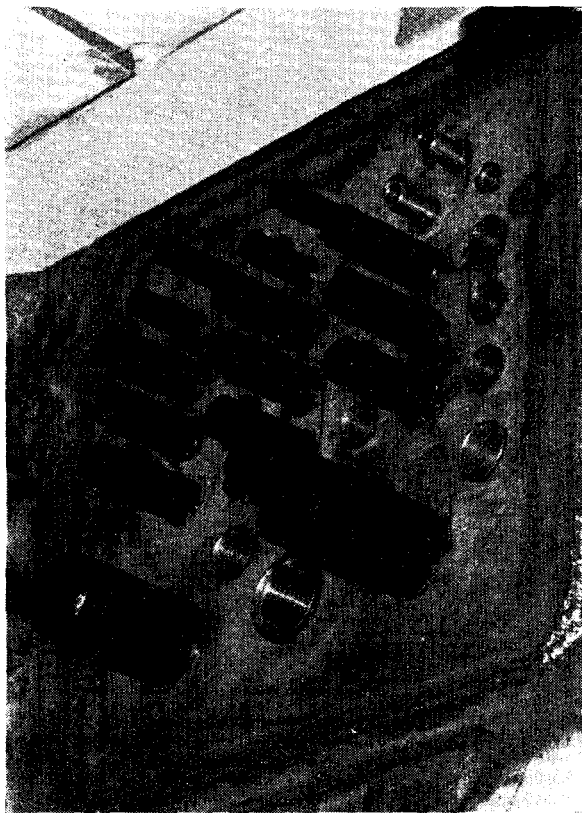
GLAND PLATE INSTALLED WITH EXPANDED BOOTS FITTED
